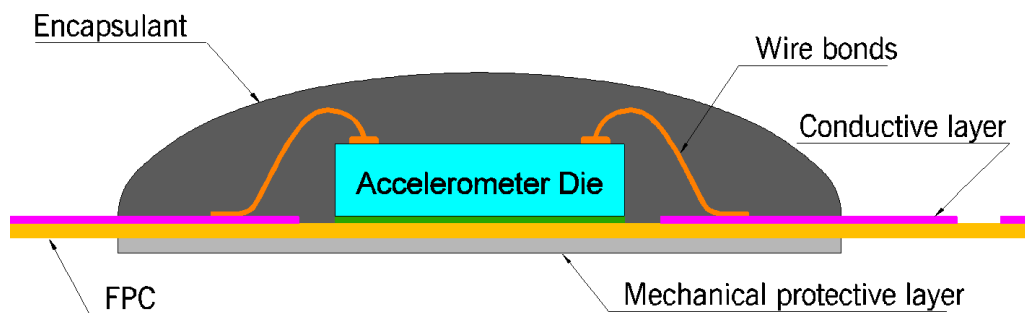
Illustration of a chip-on-board mounting to reduce the size of the sensor tape.
